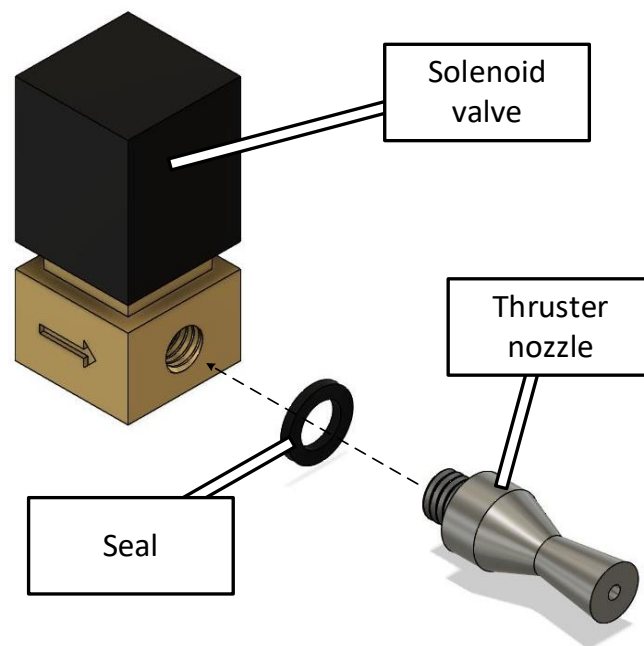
Exploded-view drawing of the components that make up a single thruster on the carrier cart.
